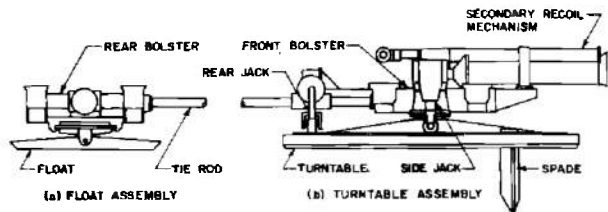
BOTTOM CARRIAGE, DOUBLE RECOIL TYPE
